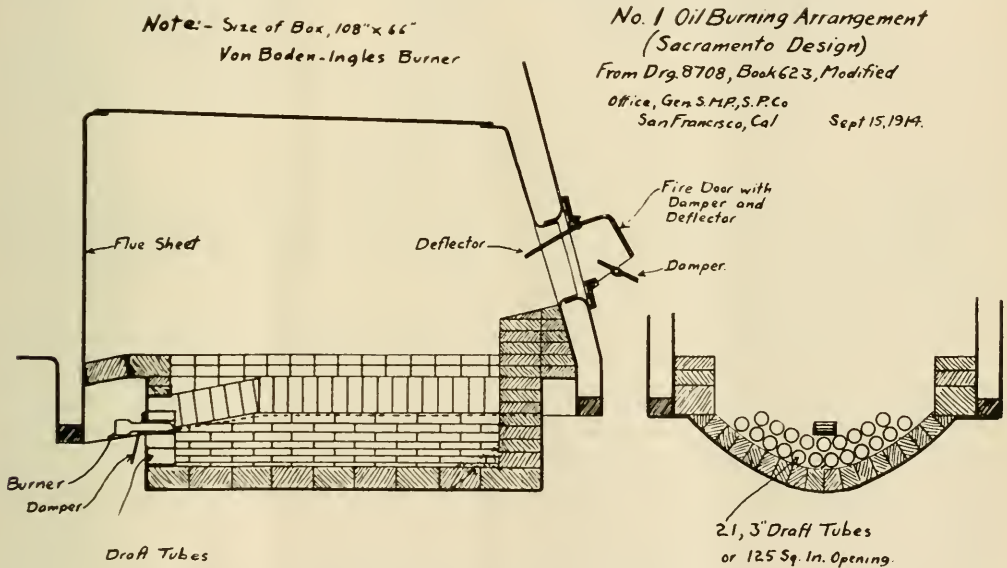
Oil Burning Arrangement with Horizontal Draft
